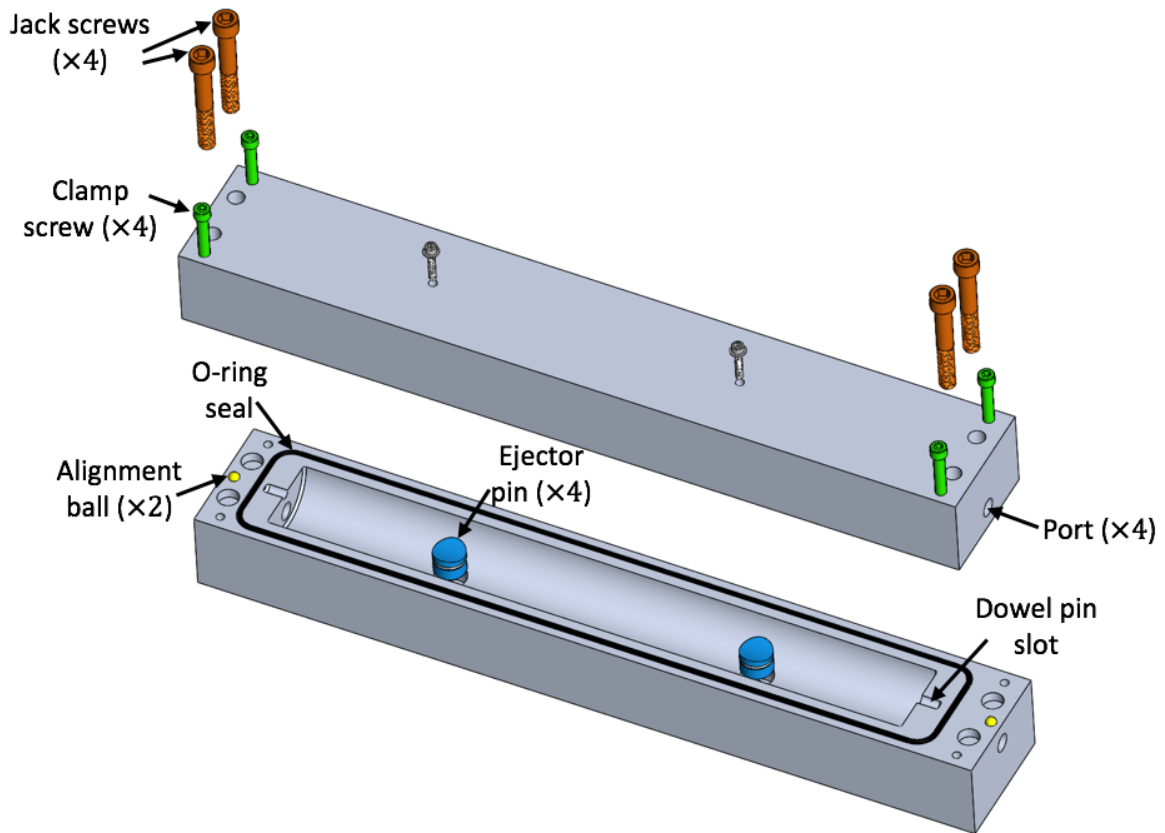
The Titanium candle mold assembly has many features to enable propellant casting.
